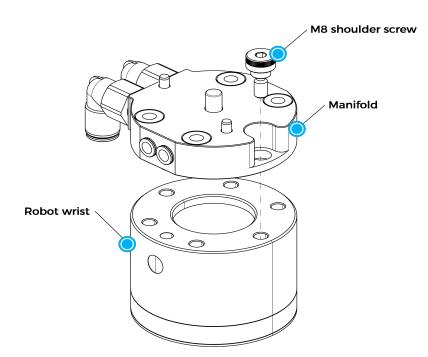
Installation of the Manifold Assembly on the Robot Wrist
